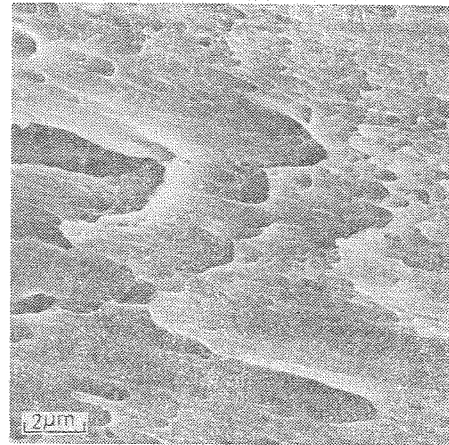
(b) Detail of area B in Photo. 3 (a) showing extremely, elongated dimples
